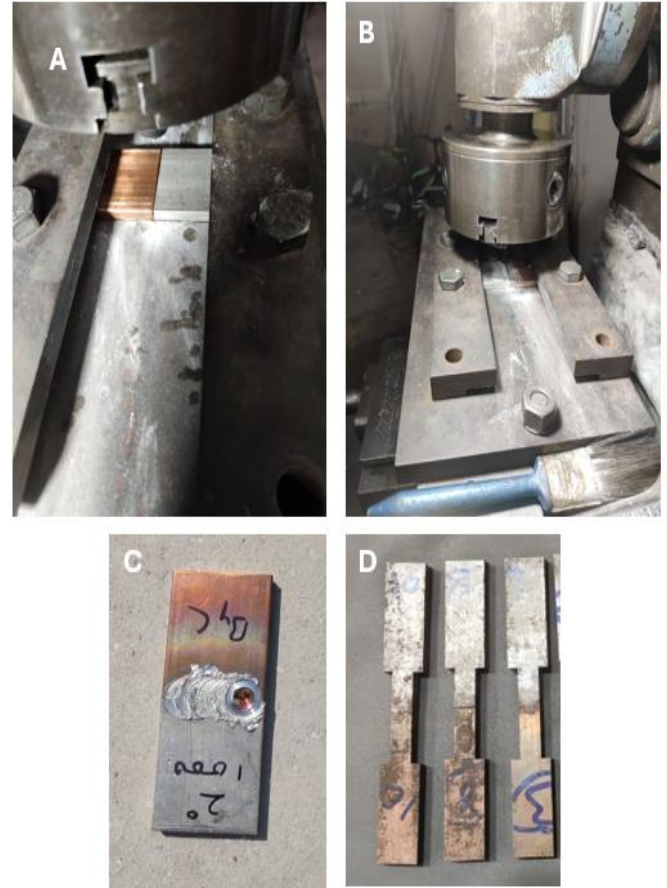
(A) Placing of workpiece on machine (B) FSW Process (C) Welded workpiece (D) Tensile samples.
